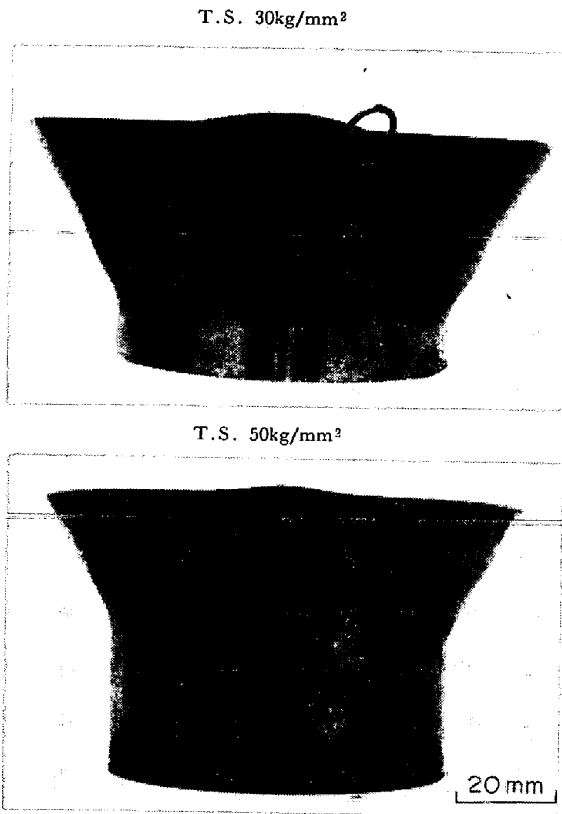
Photograph of test piece after flaring test (75φ x 1.6 mm).
